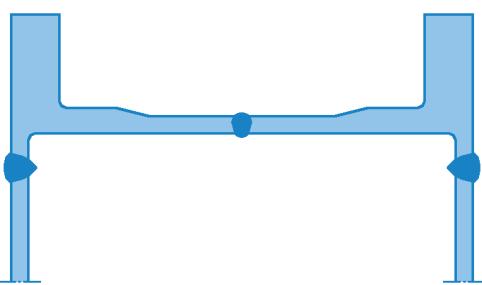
A similar guide made of aluminium extrusions. The number of welds is 3.
